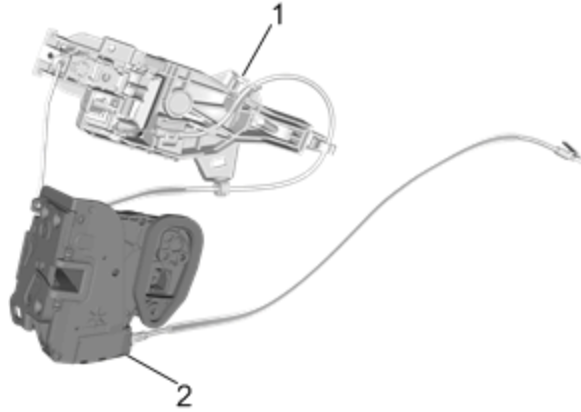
Front Door Outside Handle Bracket And Front Side Door Latch
